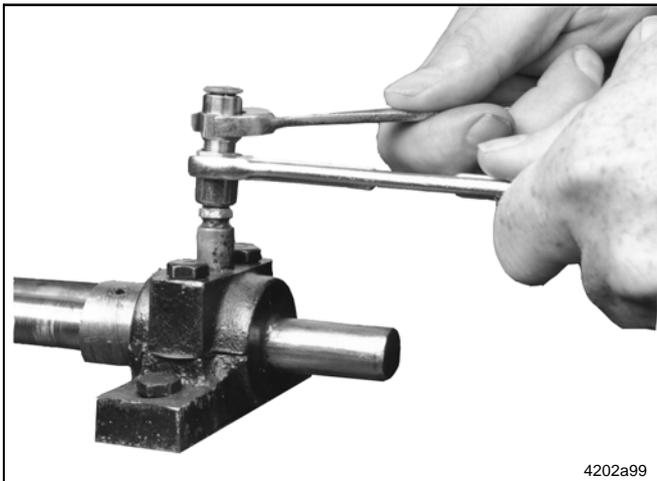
Screwing Quicklinc fitting into the Zerk-Lock body
